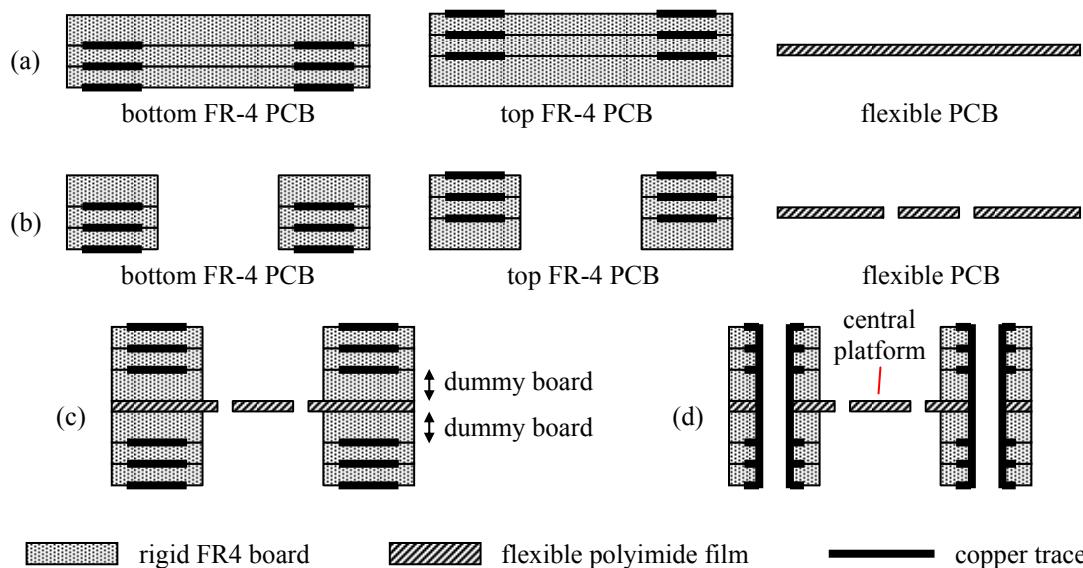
Fabrication processes, (a) preparation of rigid PCB and flexible polyimide films, (b) drilling of rigid boards and punching of flexible boards, (c) lamination, (d) through hole drilling and plating
